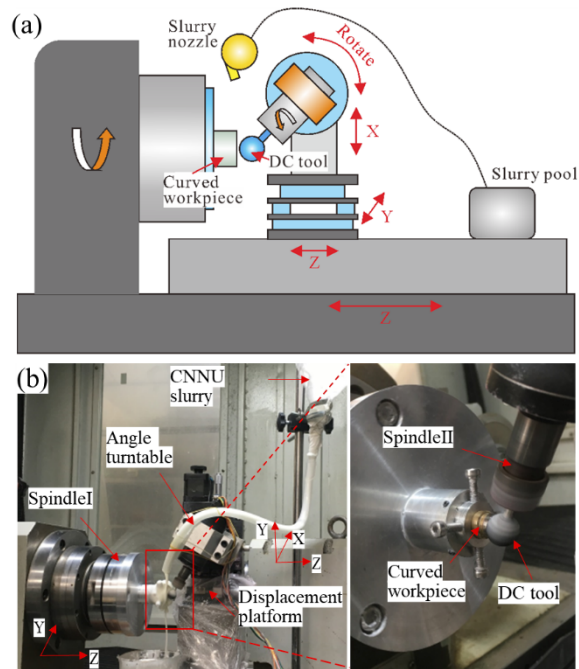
Experimental setup (a) Schematic diagram and (b) device for curved surface by using DC tool.
